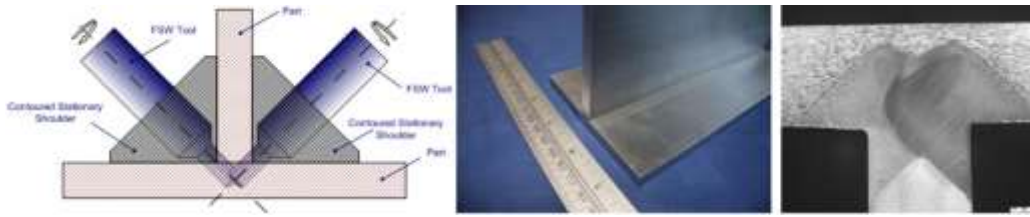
T-joints produced by the Corner SSFSW technique [65].
